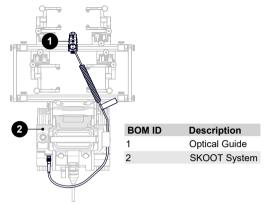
Optical Guide mounted to a low profile probe holder frame
